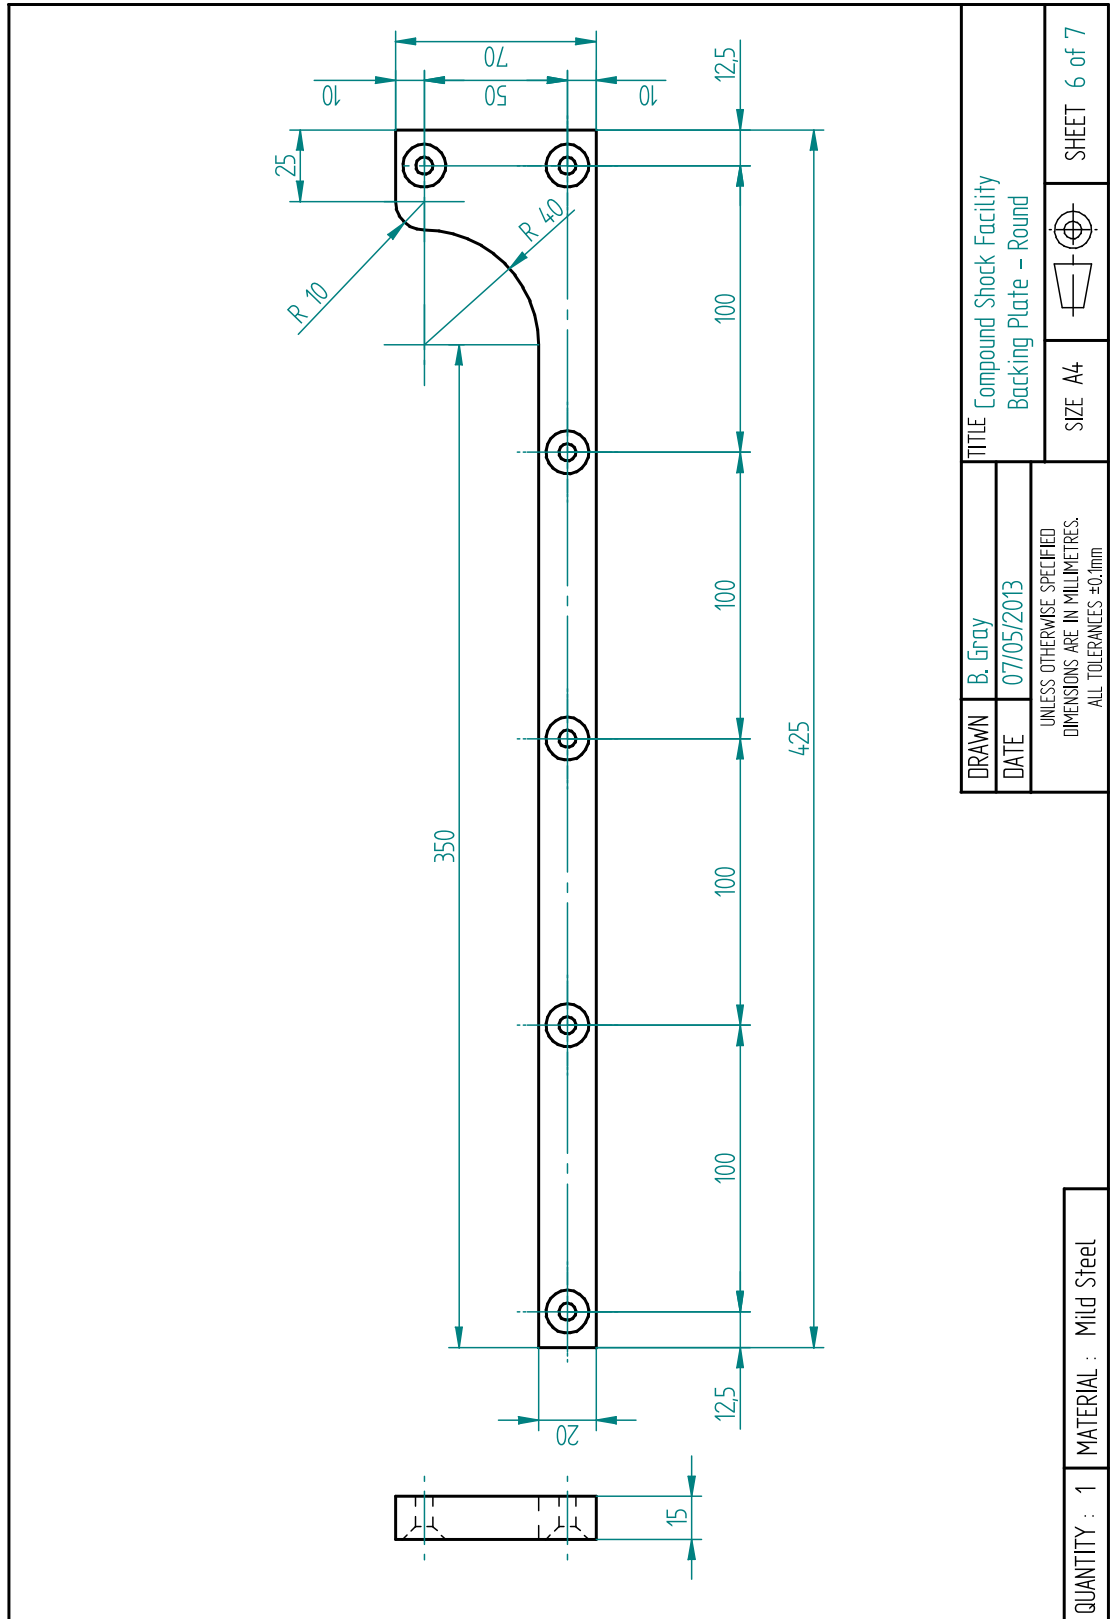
Engineering drawing of the rounded compound shock backing plate
